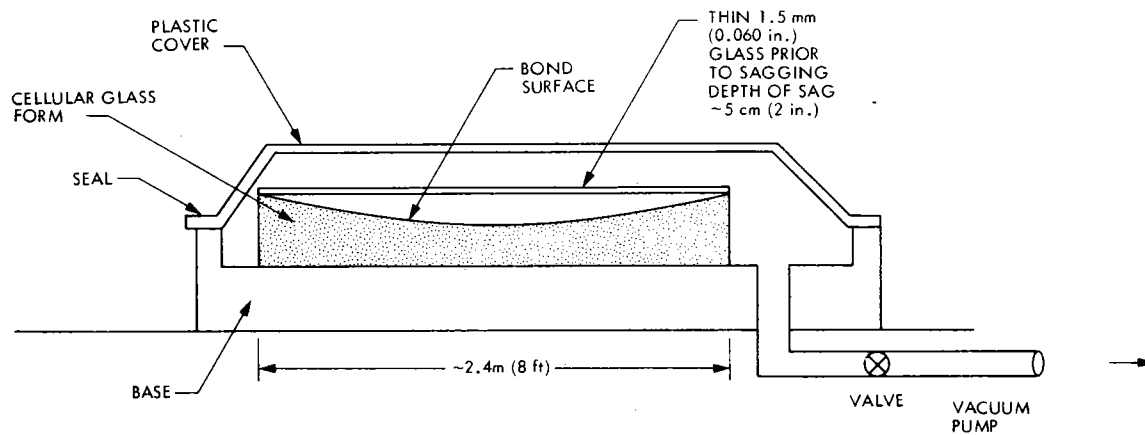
Schematic of Proposed 3D Vacuum Forming Technique
